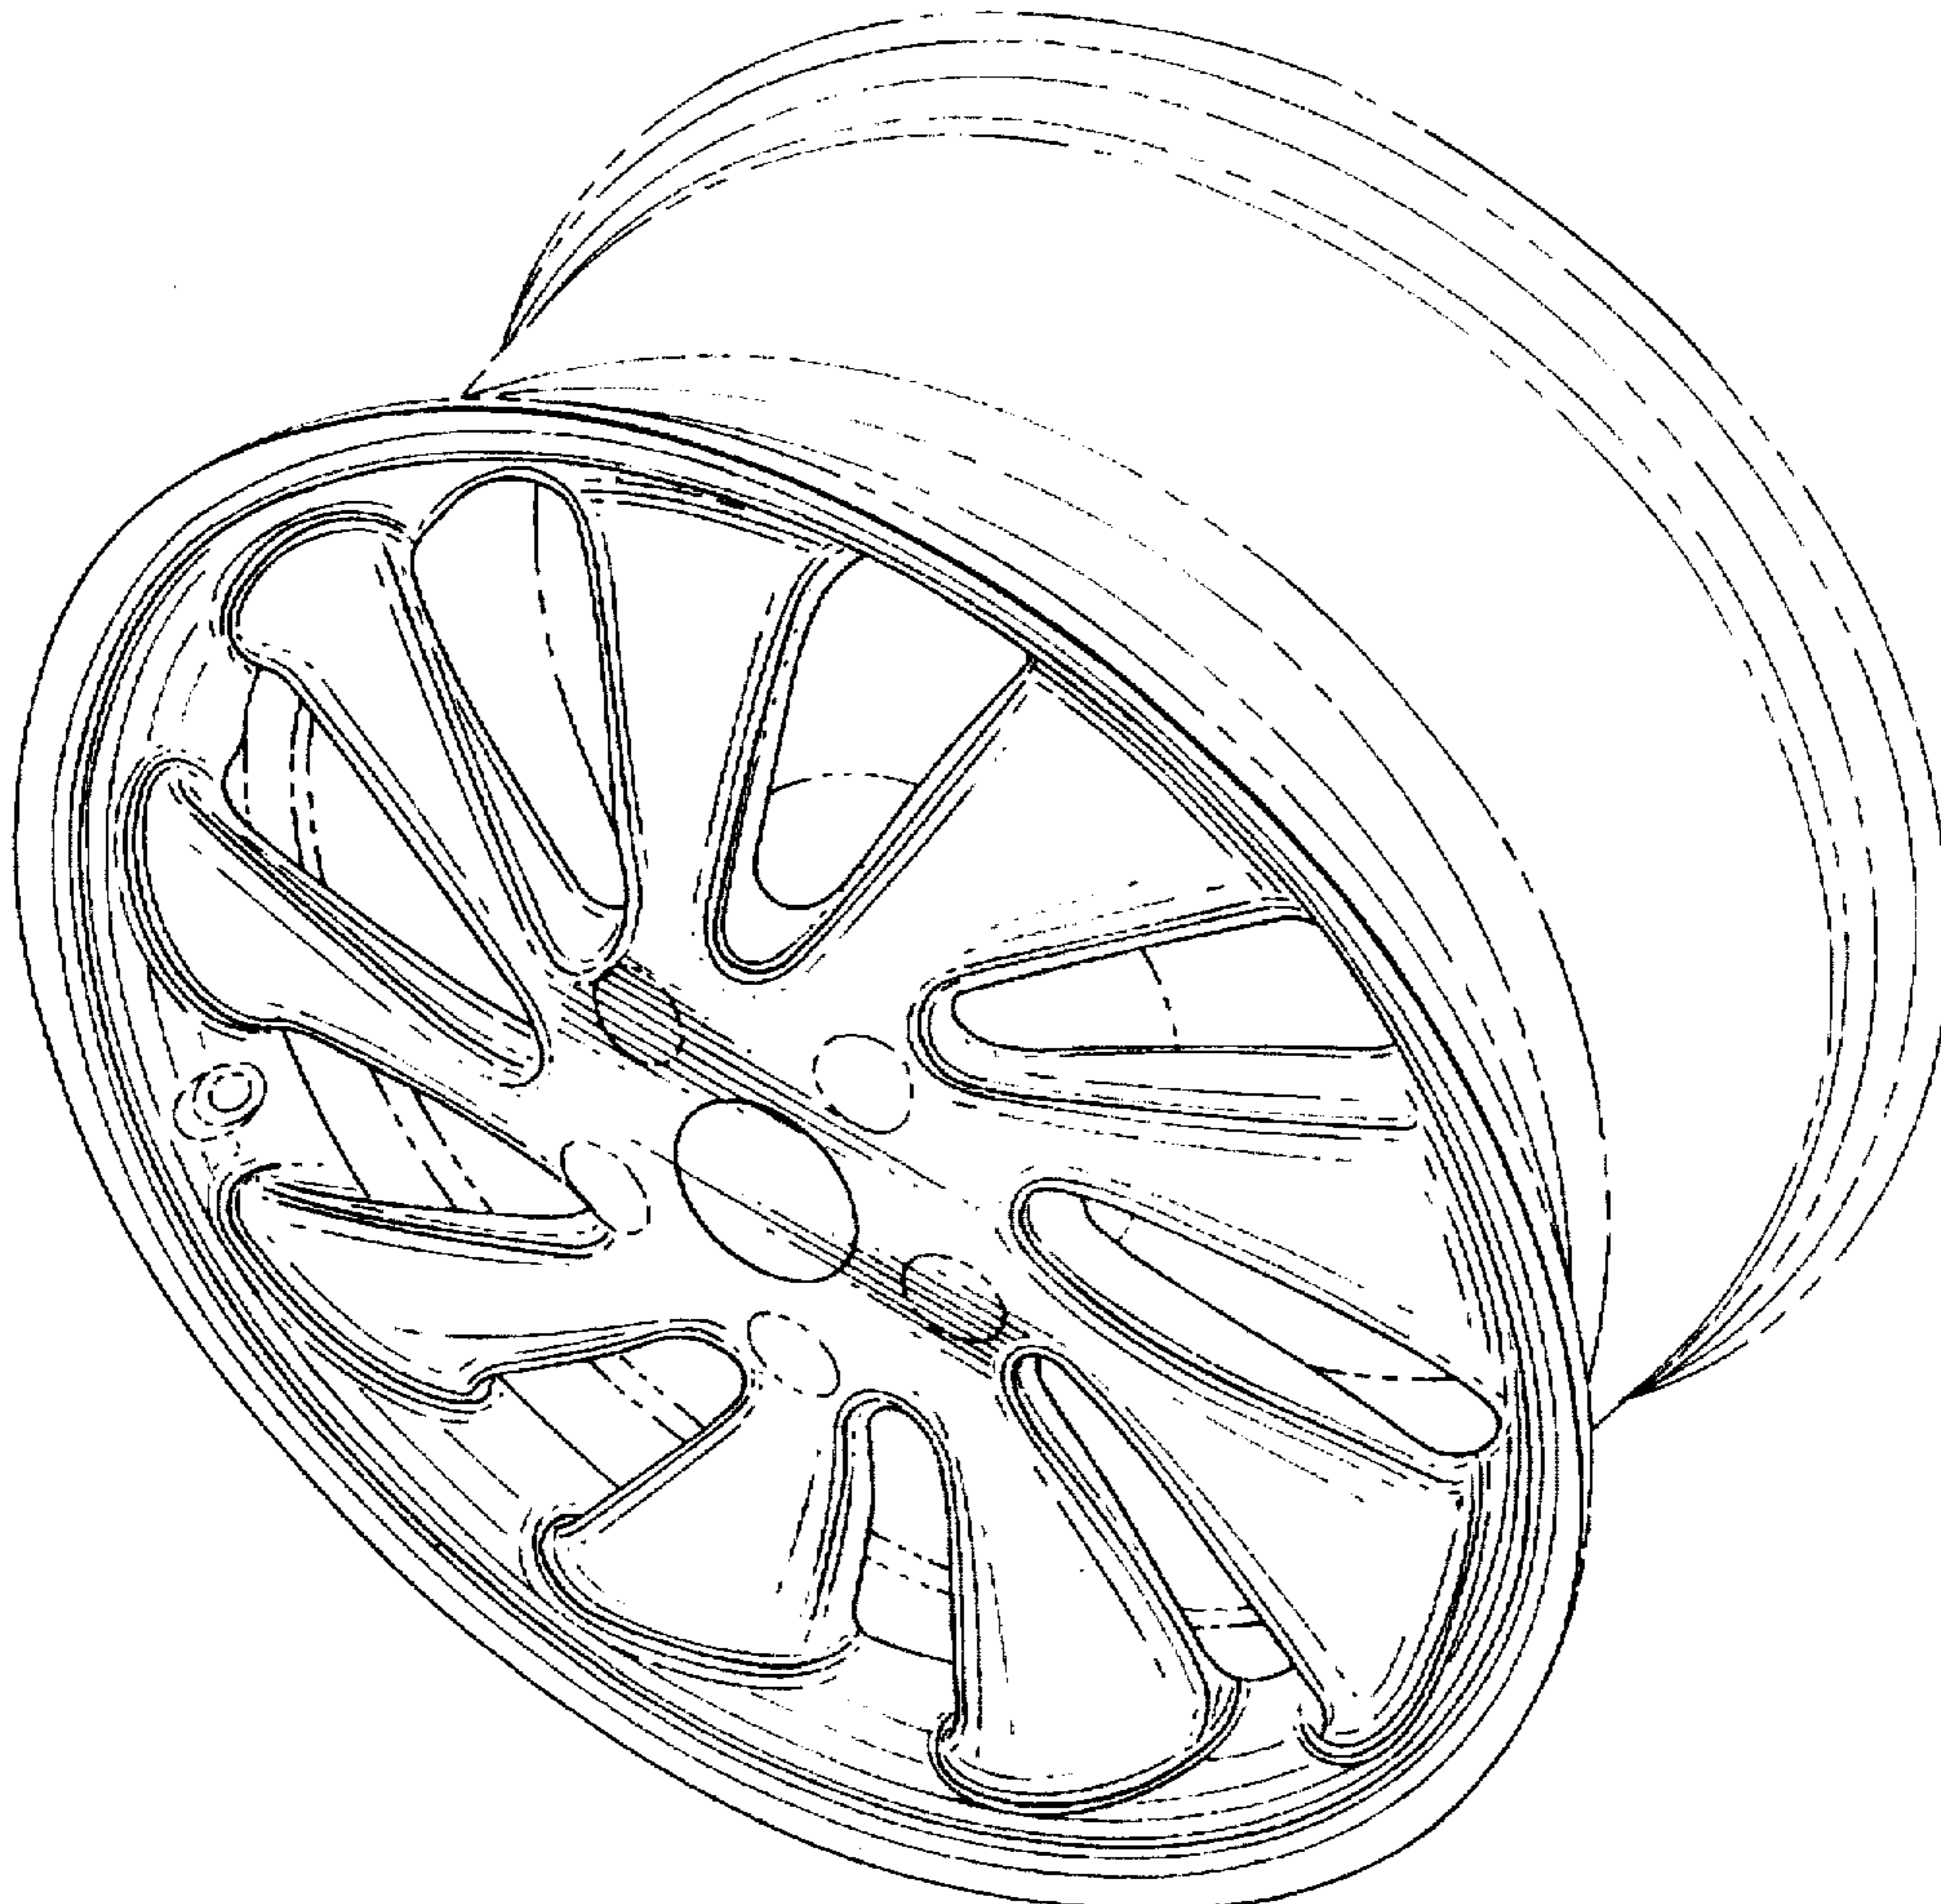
is a perspective view of a vehicle-wheel front face according to my new design;
